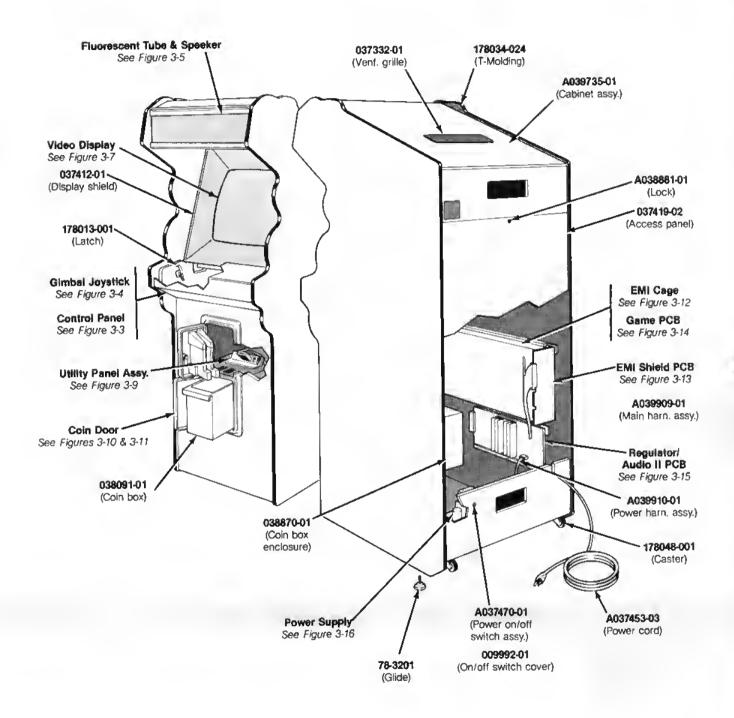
Cabinet-Mounted Assemblies US-Built Game A039734-01 A
